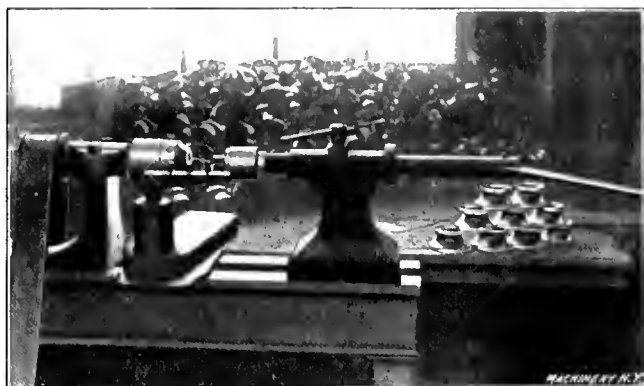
Burnishing Lathe Equipped with Split Chuck
